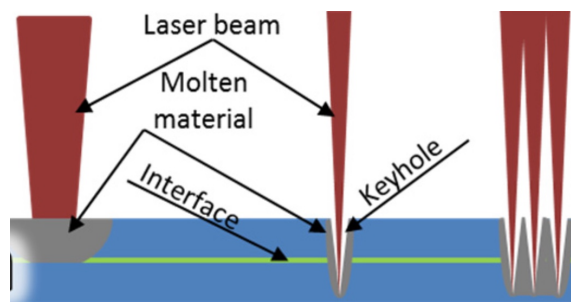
Laser surface conductive welding for overlap passes[46]
